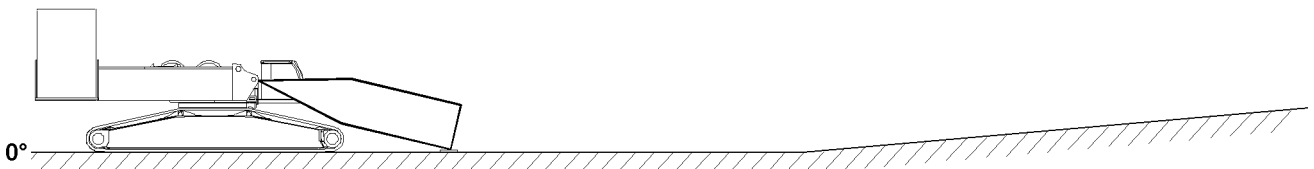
Boom - pivot section installed on turntable and placed on the ground
